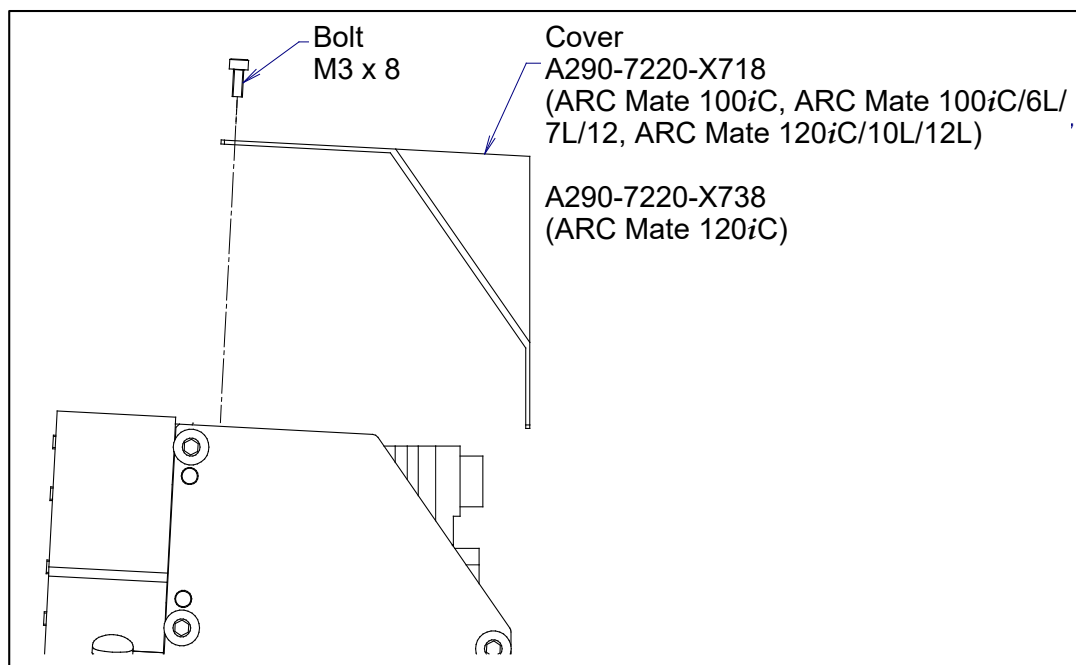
(a) Replacing motor cover (Servo torch for aluminum)
